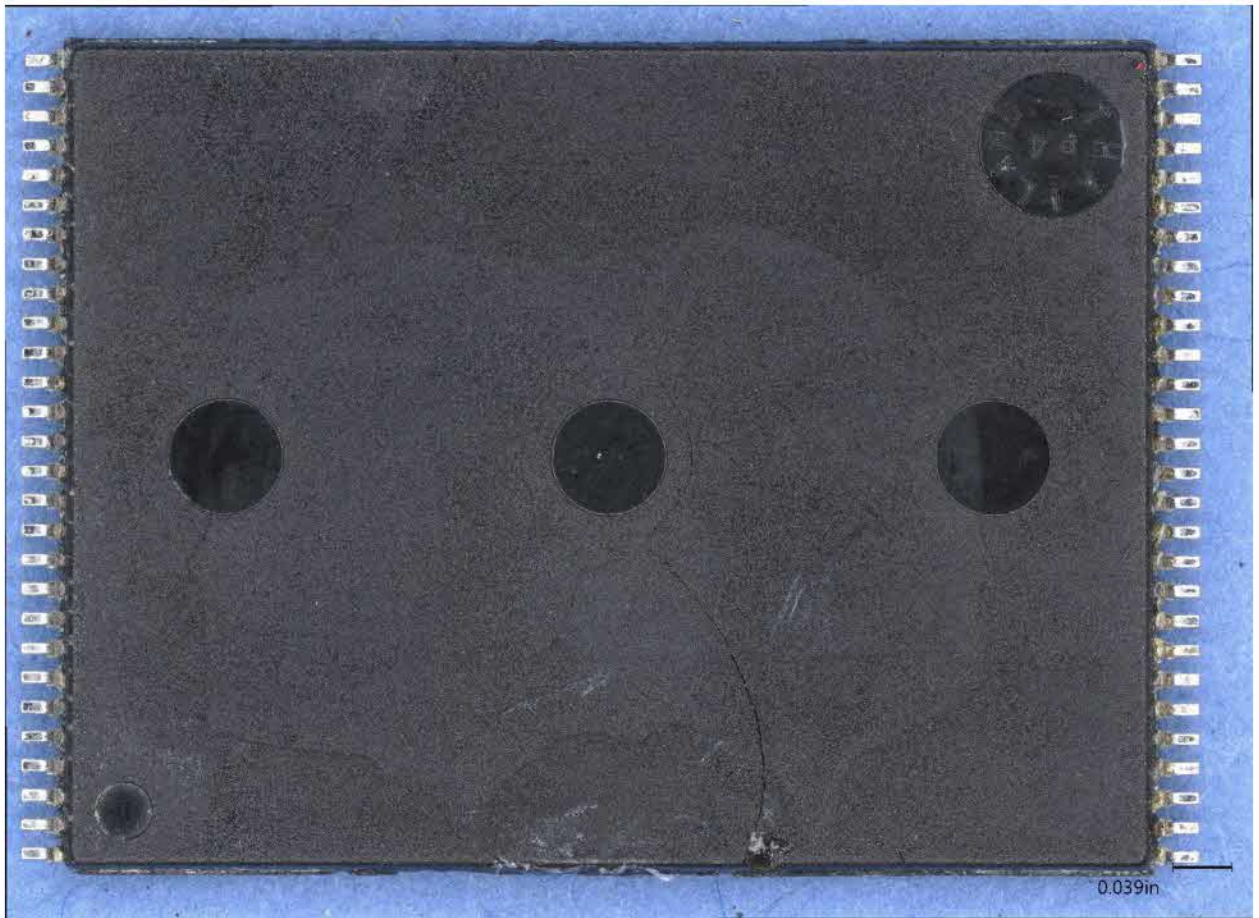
Bottom side of chip U2 showing cracks throughout chip packaging.
